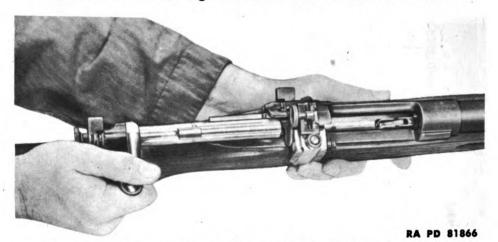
Removing Bolt From U.S. Rifle, Cal. .22, M2
